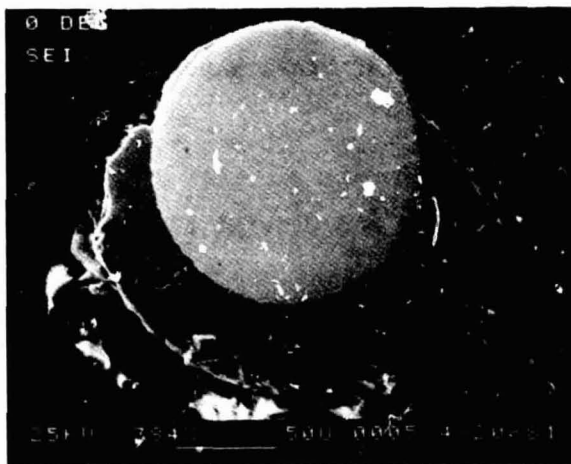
Cross-section of an electroformed wire with plating in desired shape and form
